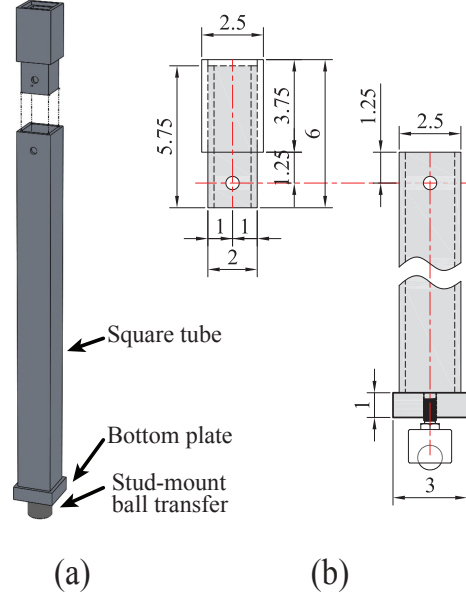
Design of the roller support: (a) perspective view and (b) side view (units: inch).
